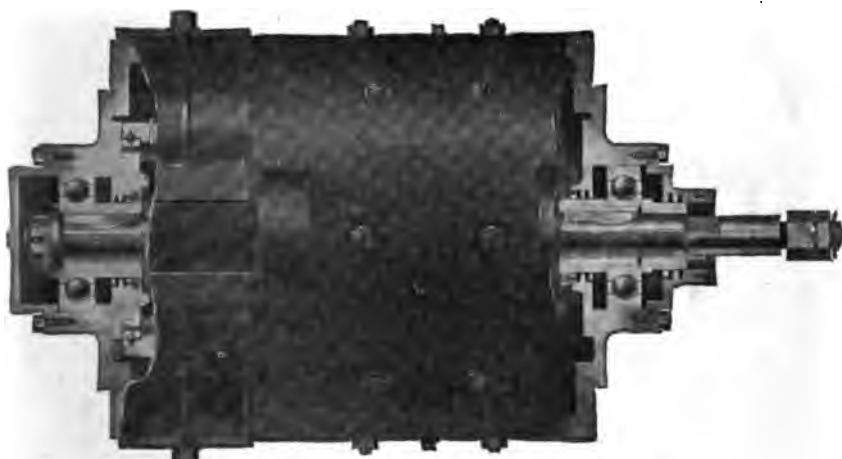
SEC. 10gg.—Sectional view Safety Truck Suspended Dynamo, showing bearings.
